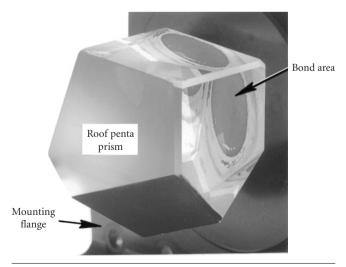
A roof penta prism bonded to a pad on a mounting flange.
